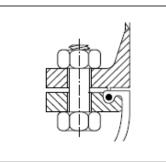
Do not use flange with tongue or groove which will damage the rubber.
